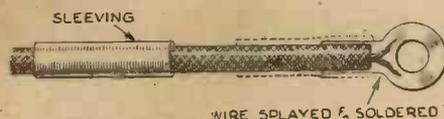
The best method of connecting a flexible lead to a terminal: by soldering on a tag.
